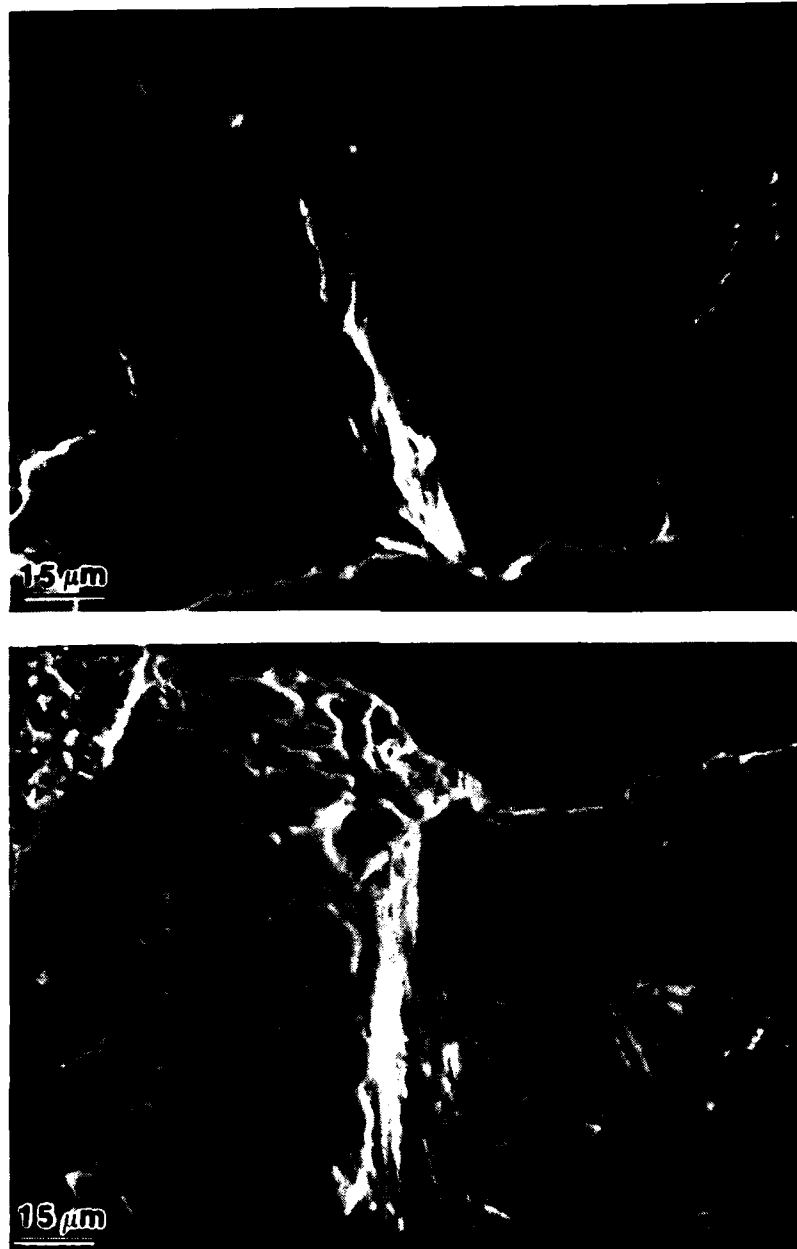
View of the matching fracture surfaces of an opened secondary crack. The specimen was of the double cantilever beam type made out of 0.25 mm thick sheet. Notice that the mud crack pattern is different on the opposite fracture surfaces.
